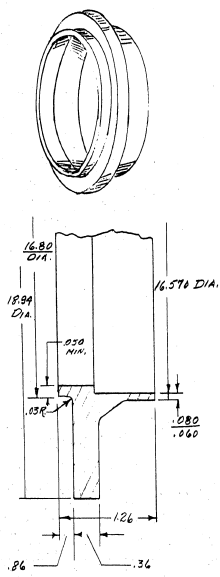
P/N 226962 - Front flange, Rear Main Bearing Support Cone Assembly, Material Ti-A-70
